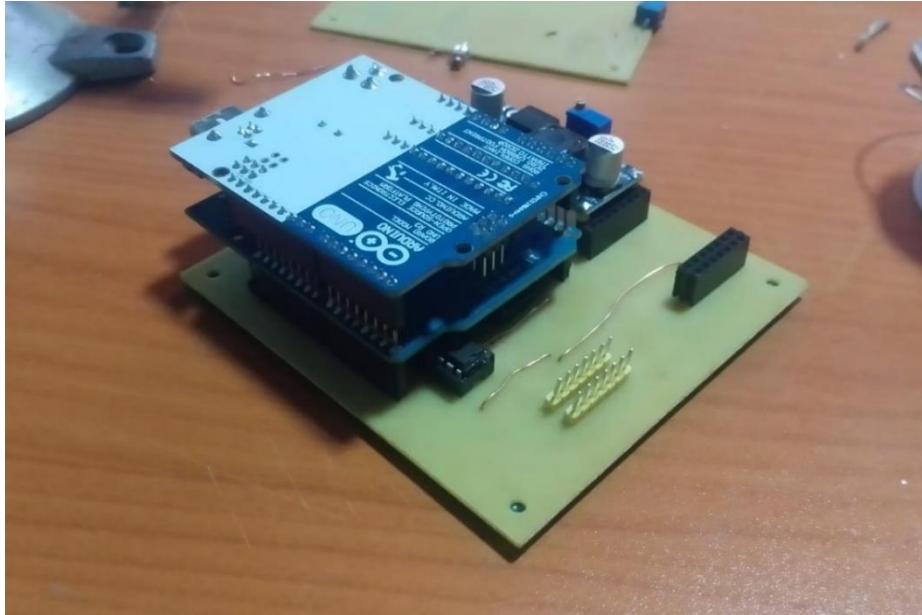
GSM module, Arduino and Machine etched circuit board system connections
